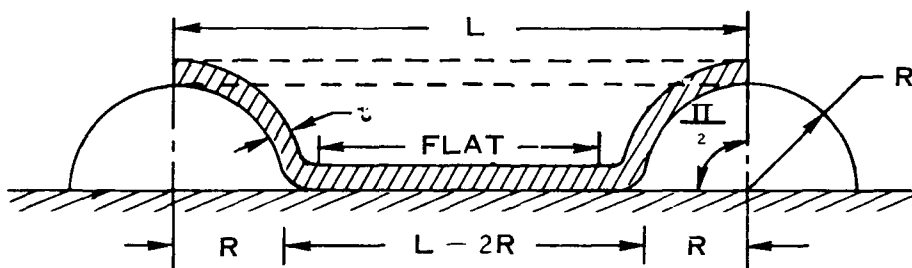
CROSS SECTION OF DROP HAMMER FORMED BEAD
